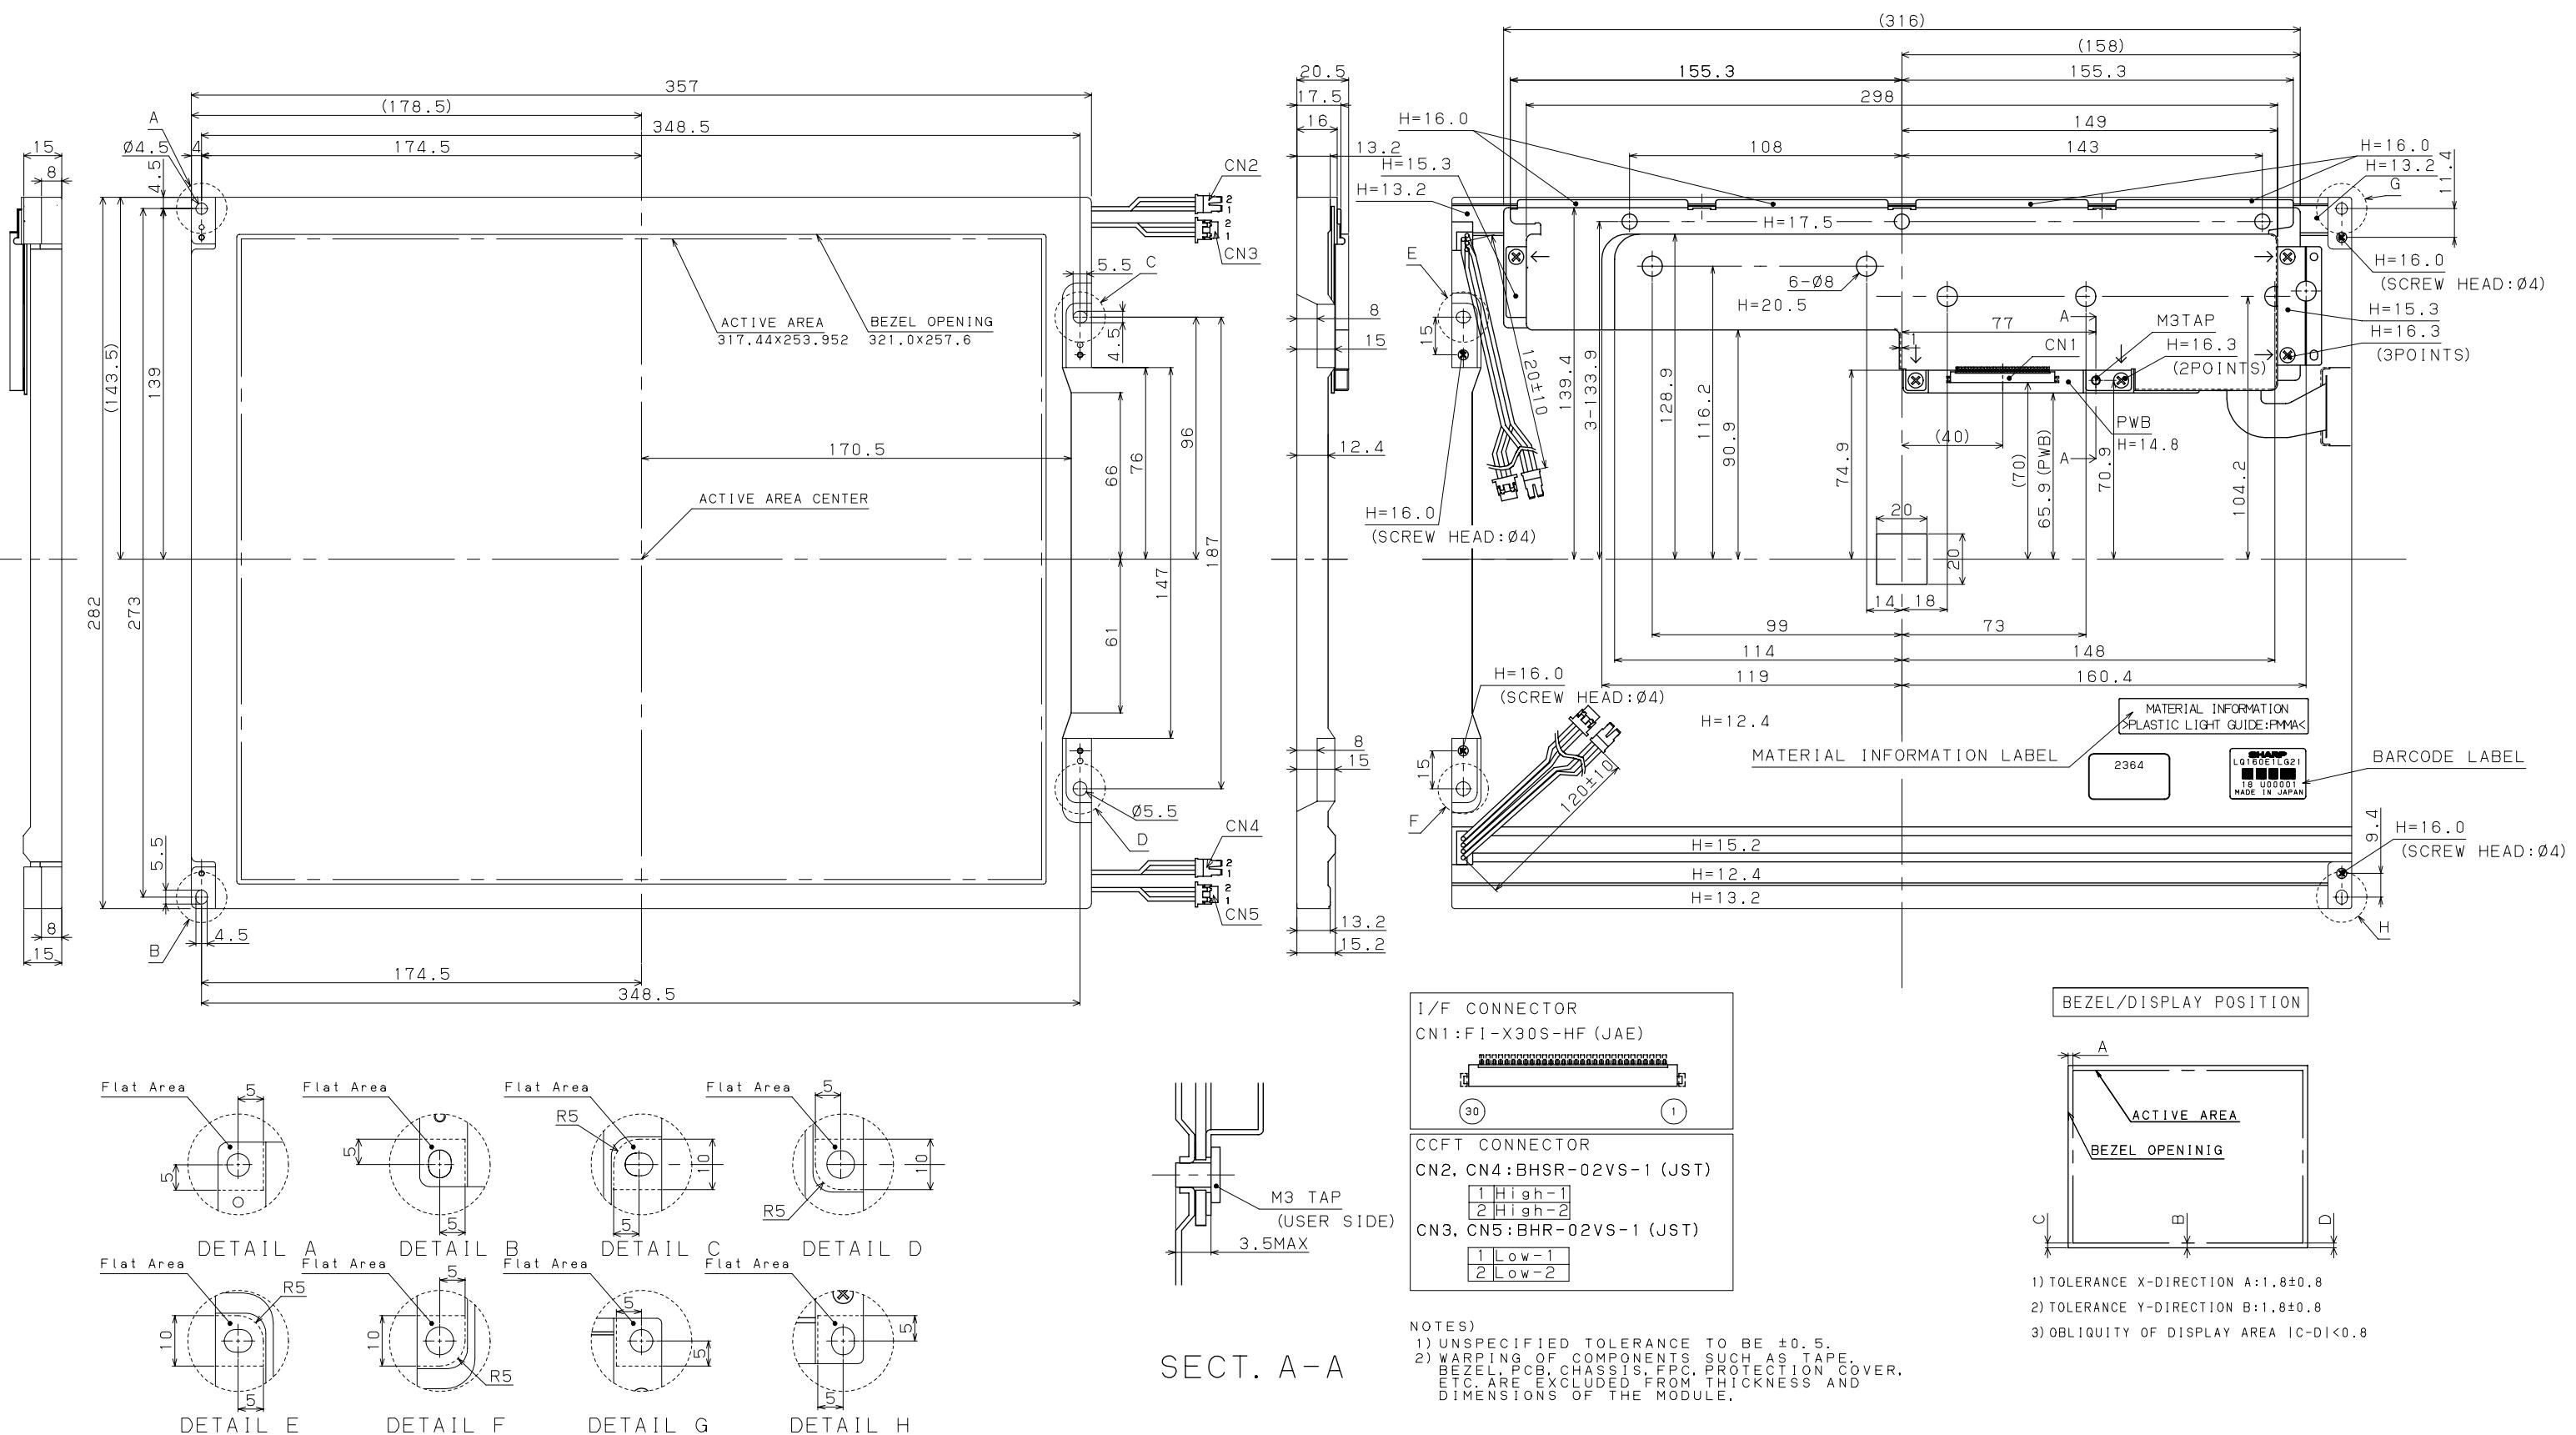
OUTLINE DIMENSIONS (LQ160E1LG21)
